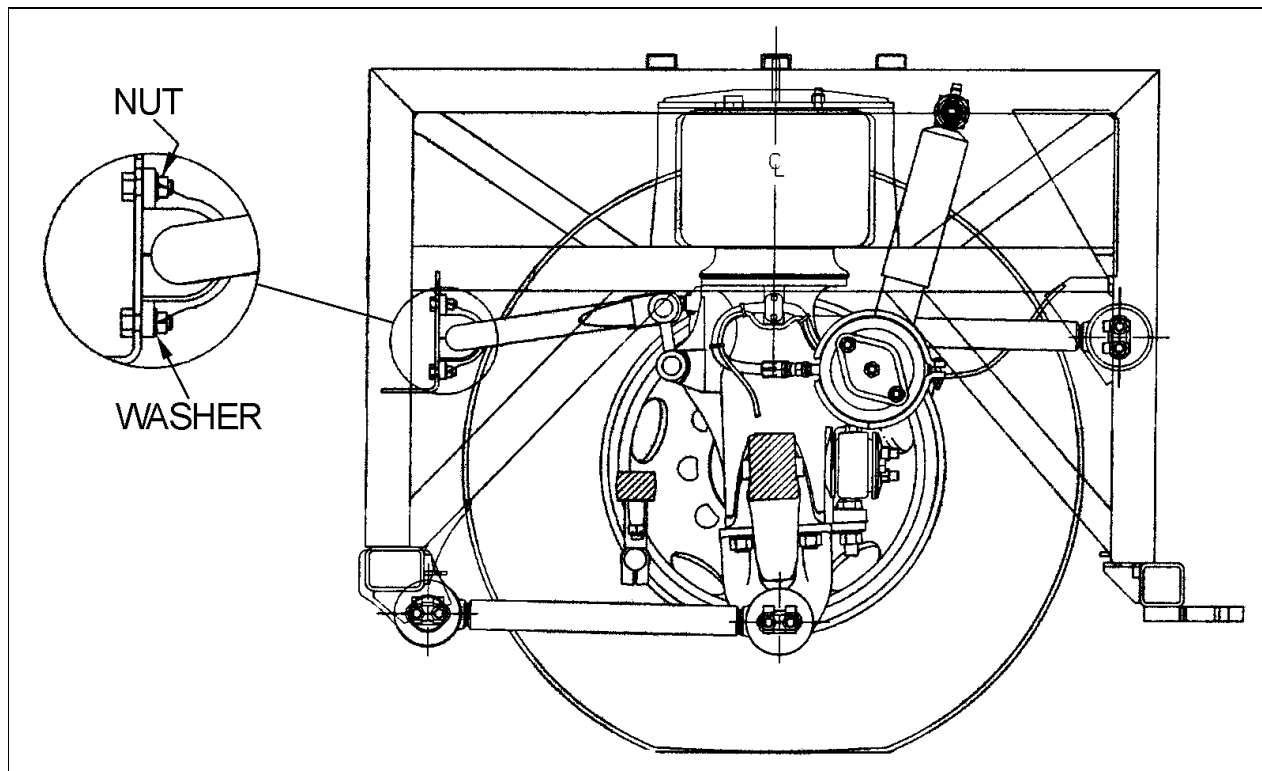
XL2 COACHES EQUIPPED WITH I-BEAM FRONT AXLE
